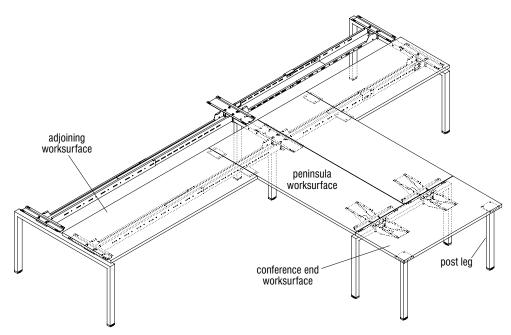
Conference End with Adjoining Dual-Sided Peninsulas
